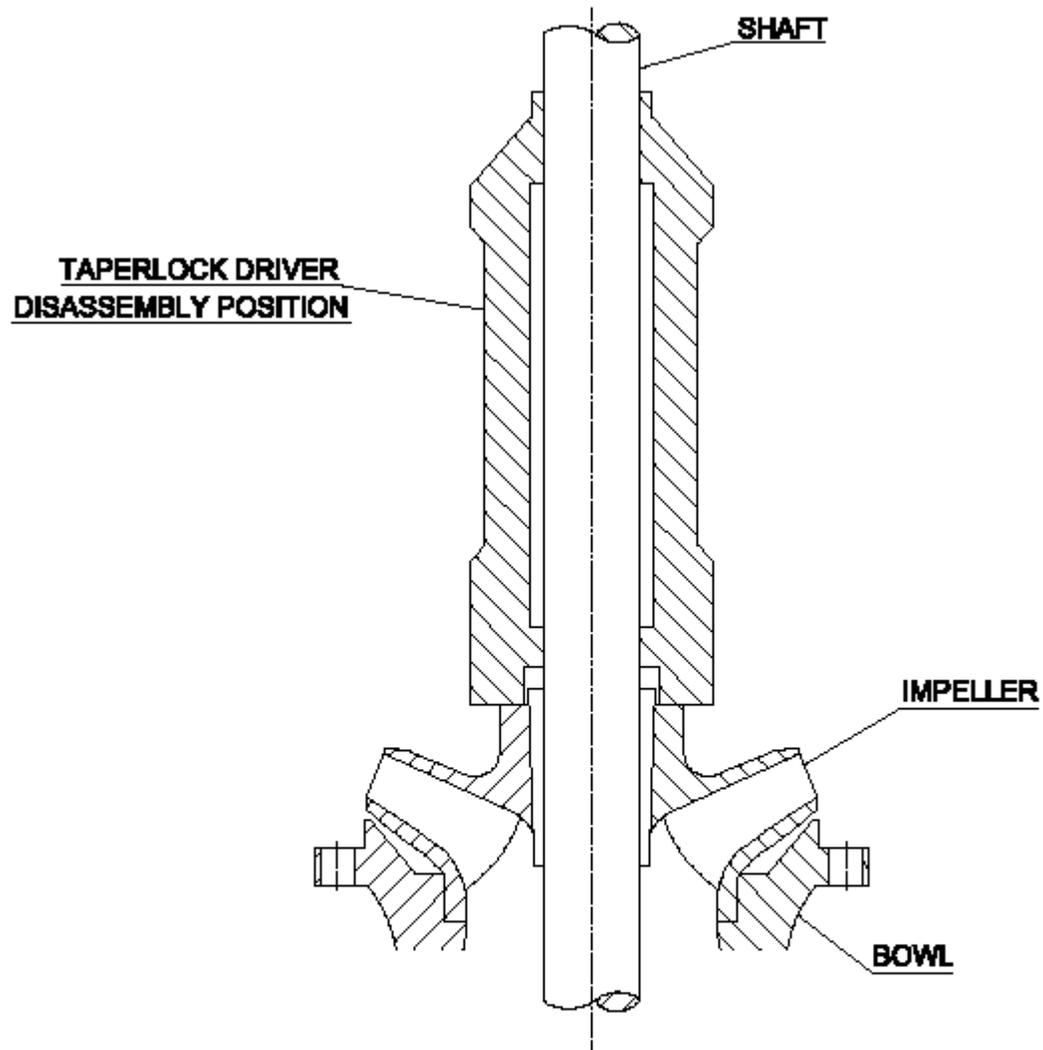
DIS ASSEMBLY OF BOWL ASSEMBLY
